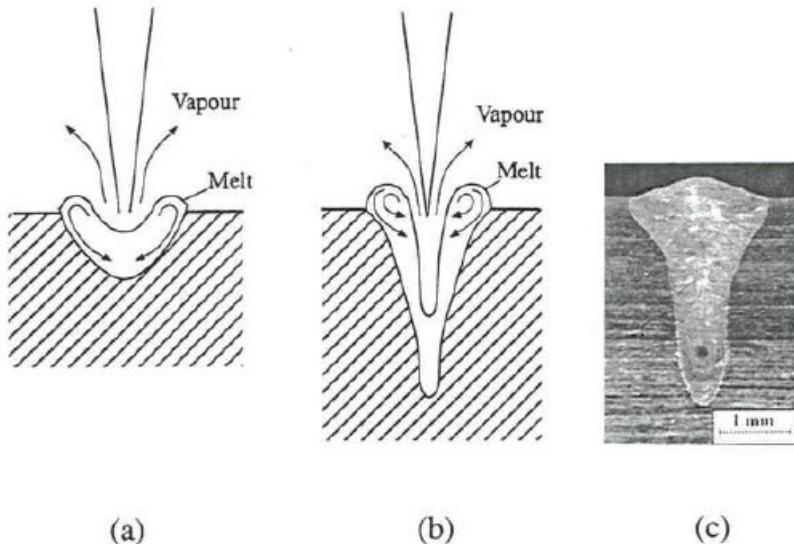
schematic diagram of keyhole depth while laser welding.
